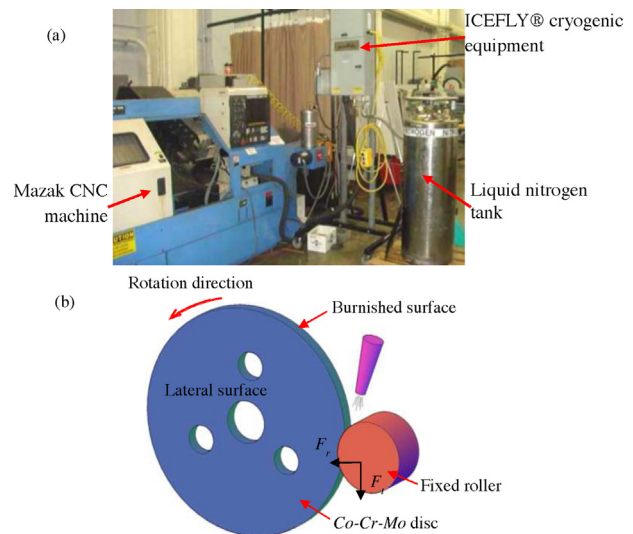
(a) Mazak CNC machine equipped with ICEFLY® cryogenic equipment and (b) schematic illustration of the cryogenic burnishing process.
